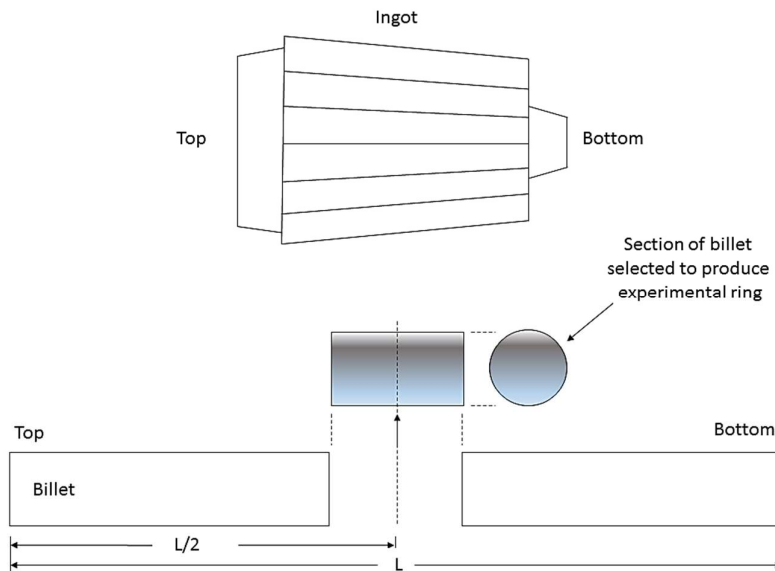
Section of the forged billet removed to fabricate experimental ring.
